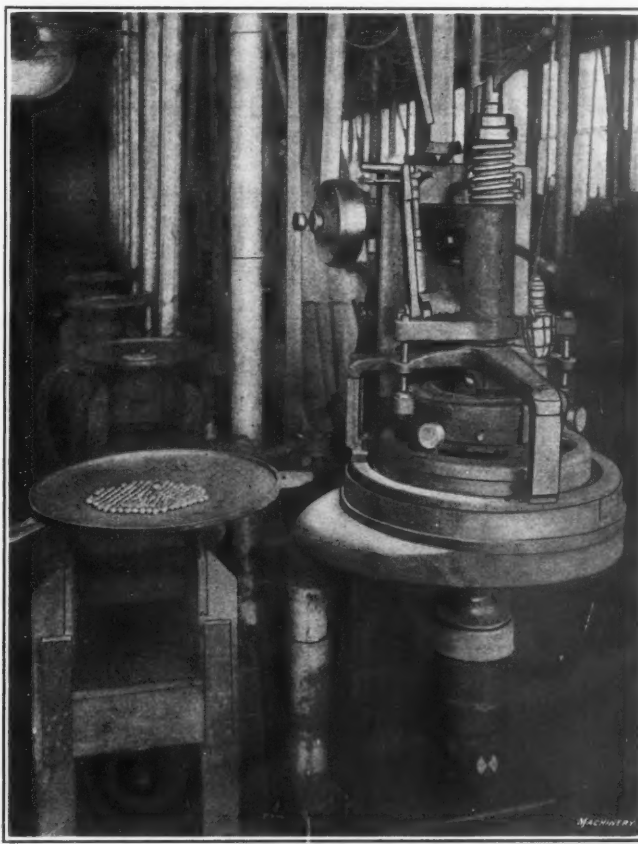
Front View of Grinding Machine, showing Grinding Wheel raised to Operating Position and Tray of Ground Balls just removed from Machine; Balls seen in Ring are not in Grinding Position
